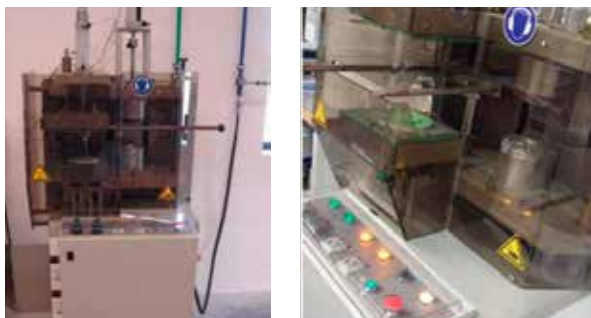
Single cavity thermoforming machine for sample cups and bowls
